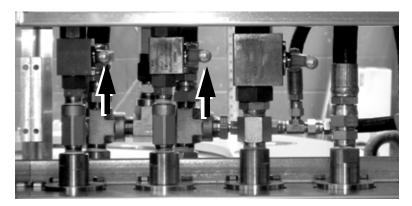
When the clamping drive is fully engaged (clamping pressure equals system pressure), return both clamping levers to the up position.
